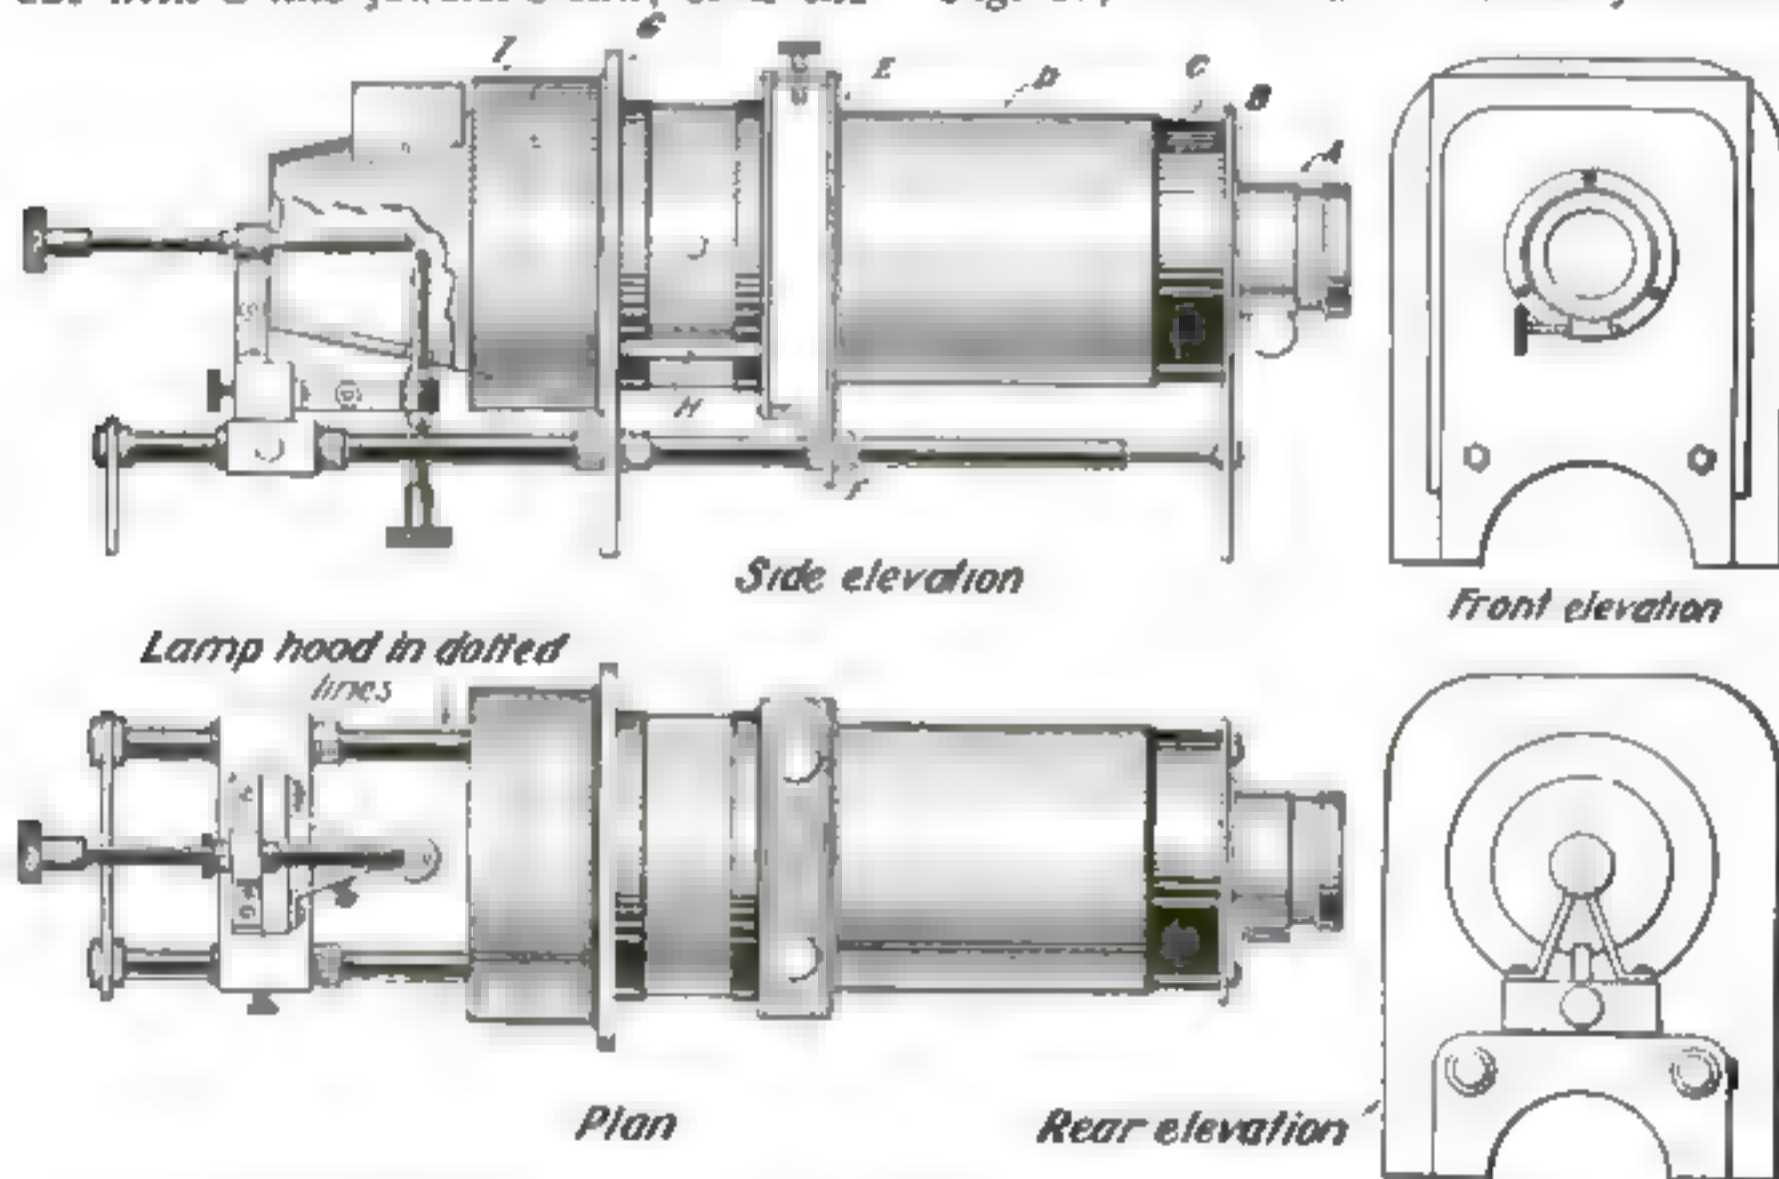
The objective assembled. The lenses are usually supplied in a mounting, with a flange and knurled adjusting knob, which actuates a rack and pinion arrangement
